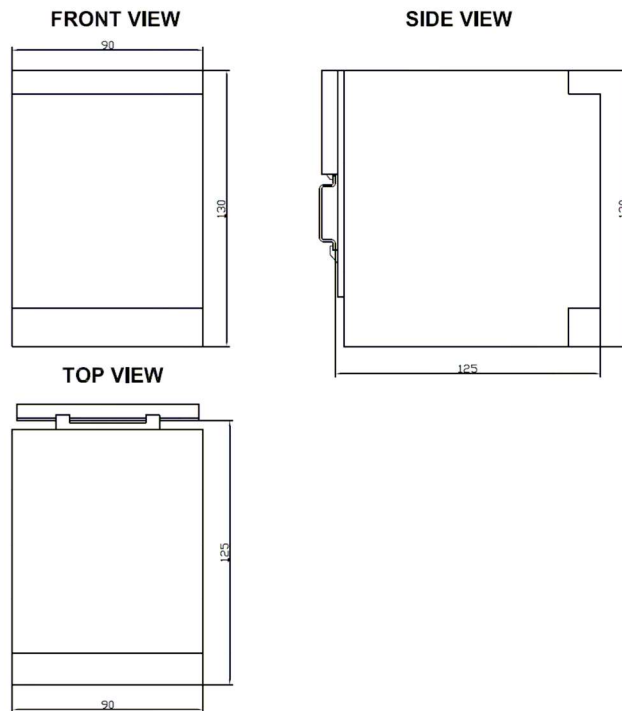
Power Supply Unit QUINT PS/1AC/24DC/20 dimensional drawing
